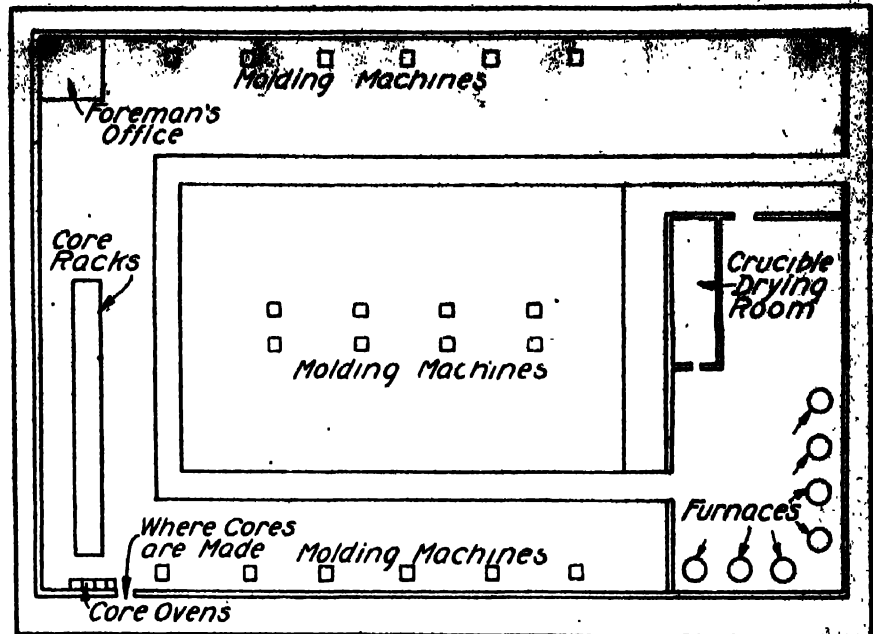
LAYOUT SHOWING THE ARRANGEMENT OF GANGWAYS AND POURING FLOORS AND THE SEPARATE FURNACE ROOM
